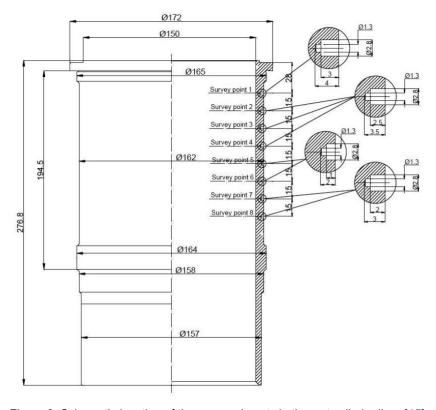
Schematic location of thermocouple sets in the wet cylinder liner [15].
